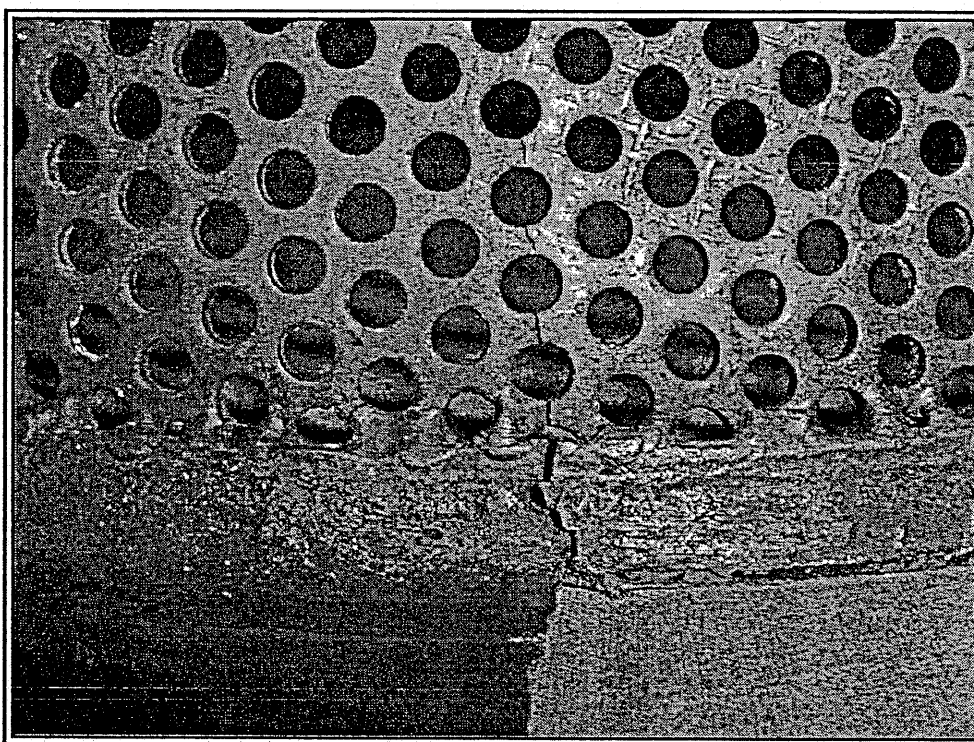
Photograph of the flange cracks in the witch's hat strainer
